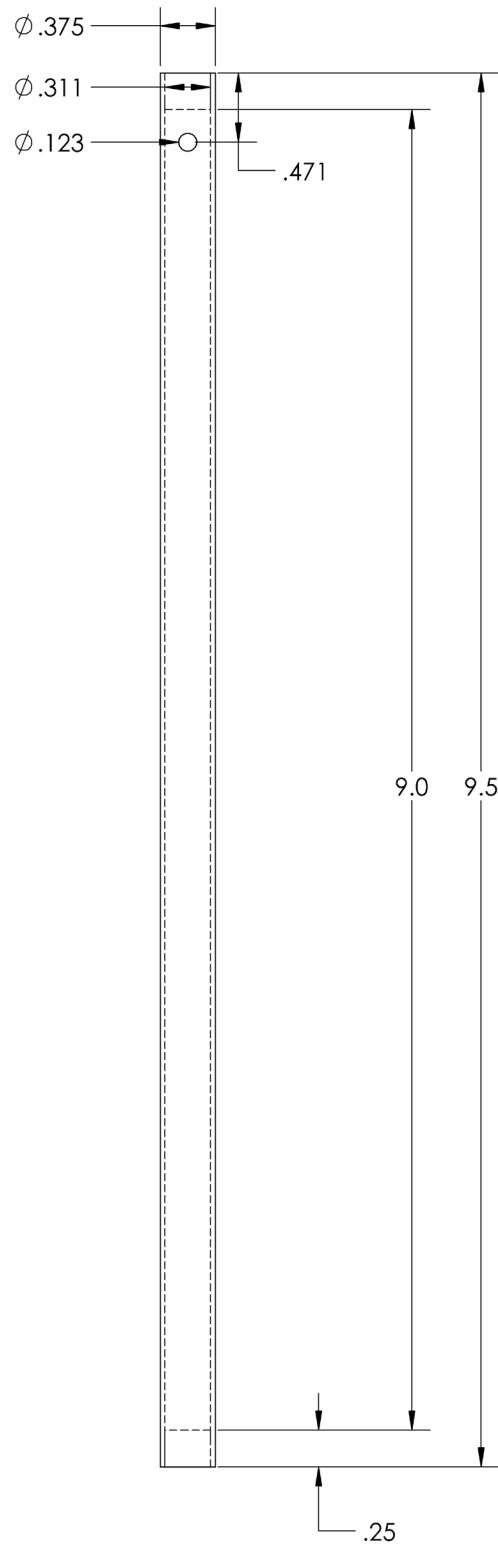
Schematic of ampoule with 0.123 in. drill hole.
